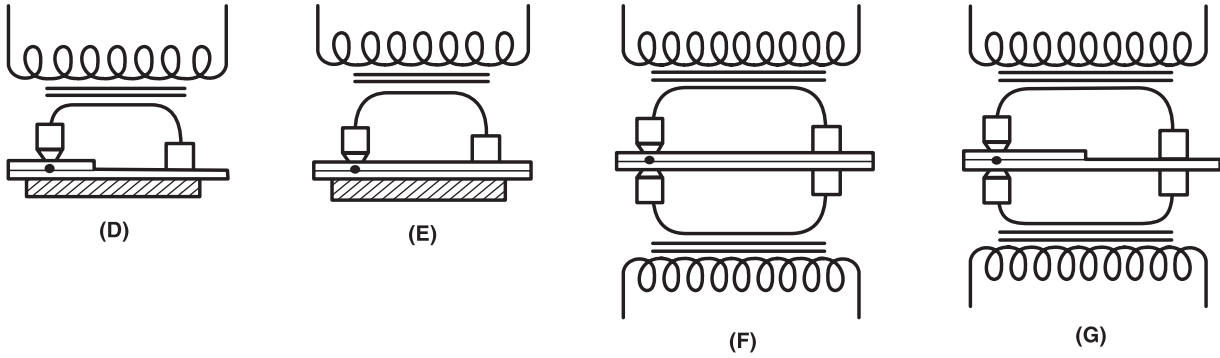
Typical Arrangements for Multiple Spot Welding
